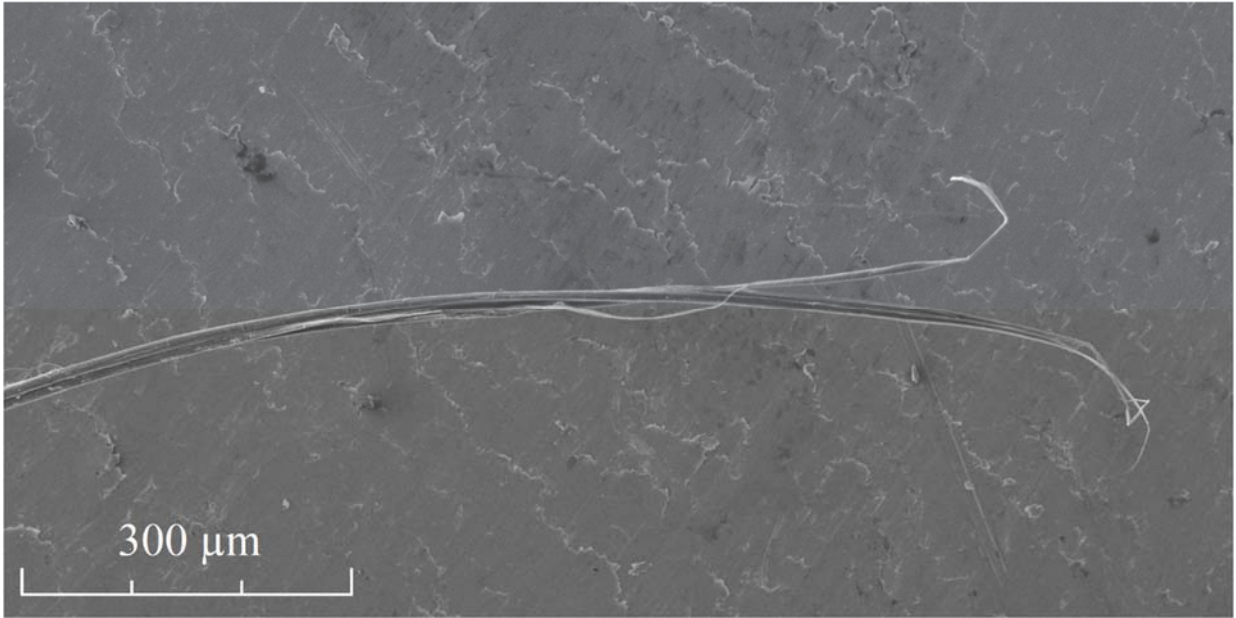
Opposing fracture surface of long-life static loading specimen
